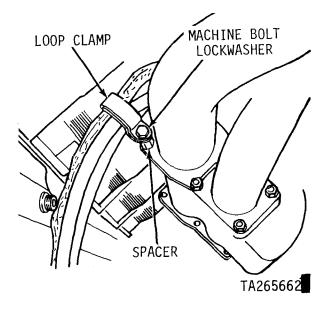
Removing or installing wiring harness loop clamp.
